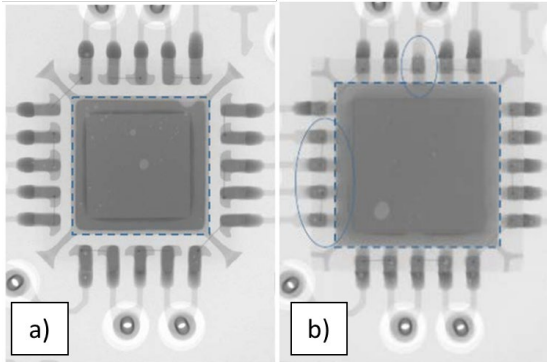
MLF-20 Component Footprint Discrepancy Showing Package Size and Solder Bridging; a) SnPb Solder, b) SAC305 Solder
